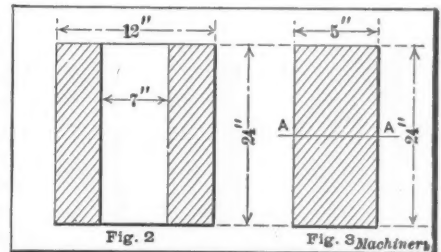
Section of Top Casting at Center. Fig. 3. Equivalent Section of Top Casting
